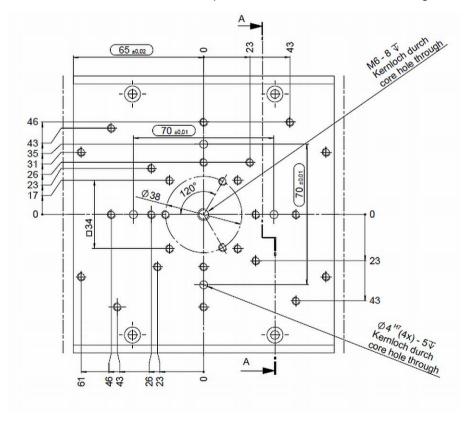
Hole pattern of the moving platform (PI standard hole pattern)
